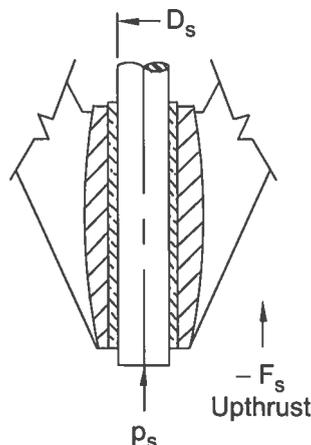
Enclosed end of shaft at suction
